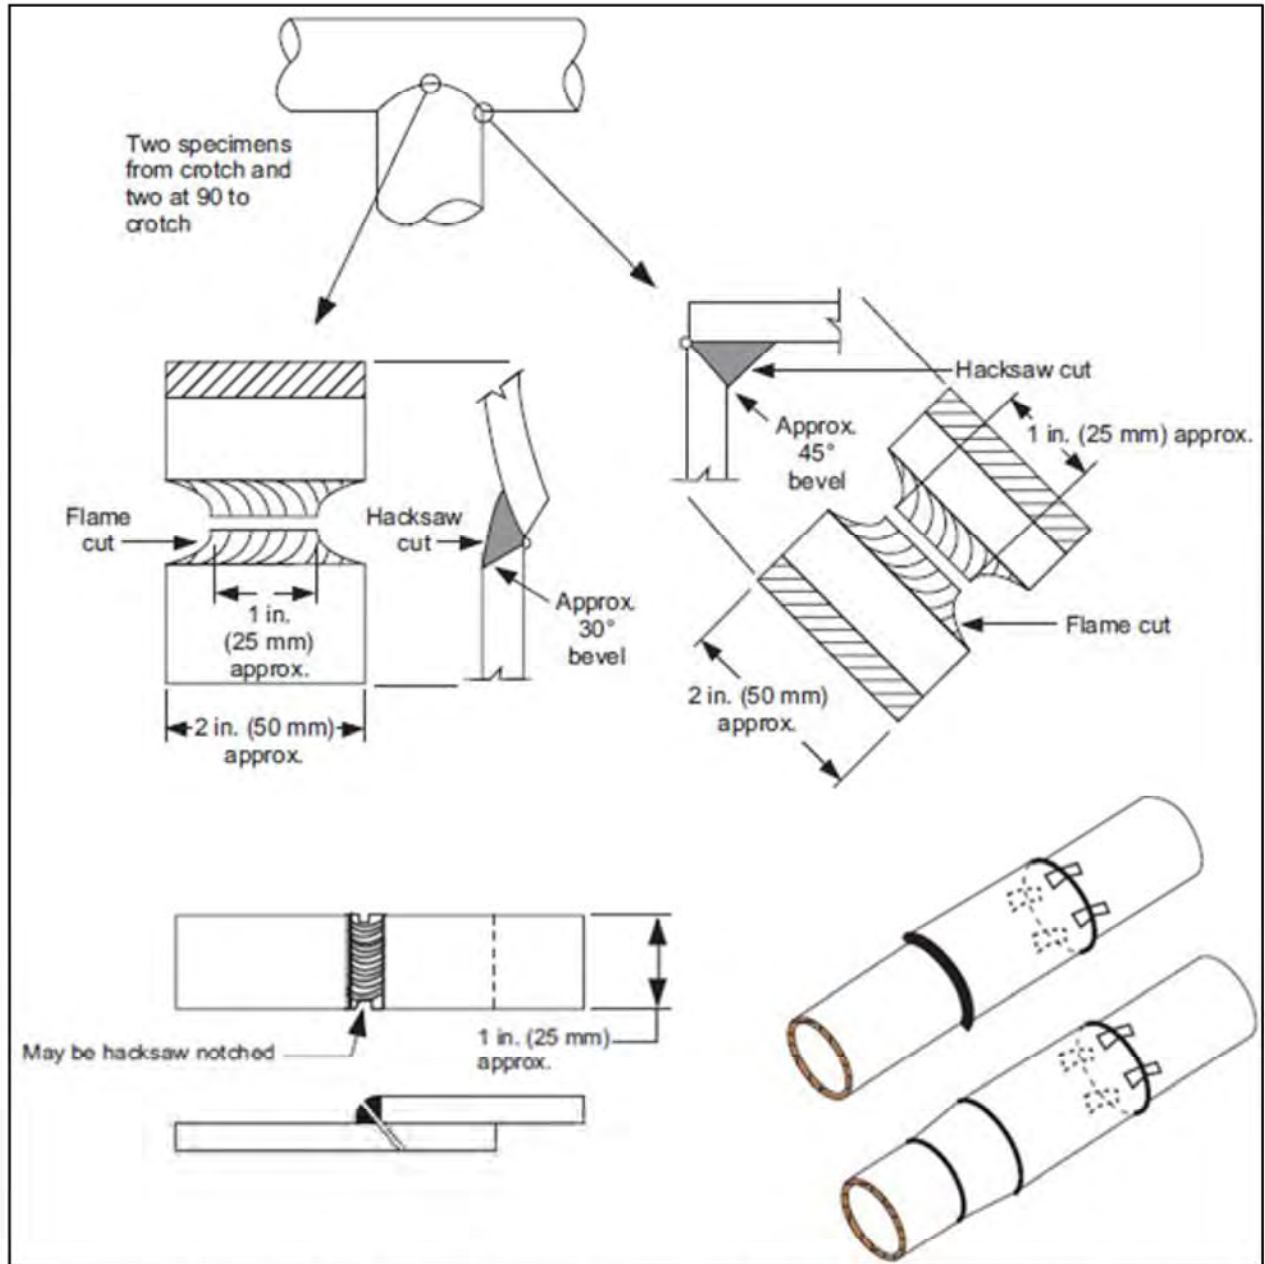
Location and Preparation of Nick-Break Branch Groove and Fillet Welding Procedure Qualification Test Specimens
